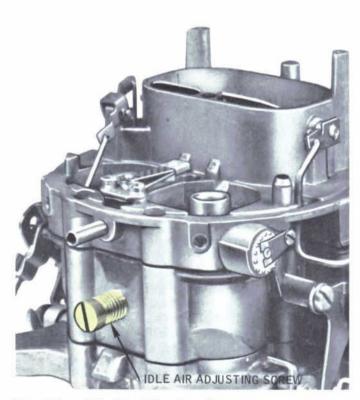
Idle Air Adjusting Screw — Autolite Model 4300 Carburetor for Thunderbird
